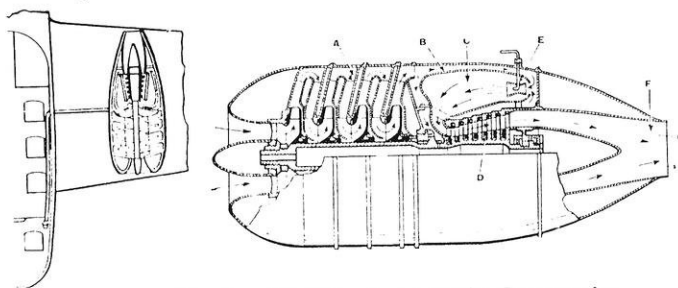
The Swedish Milo Axial Turbo-Compressive Unit
